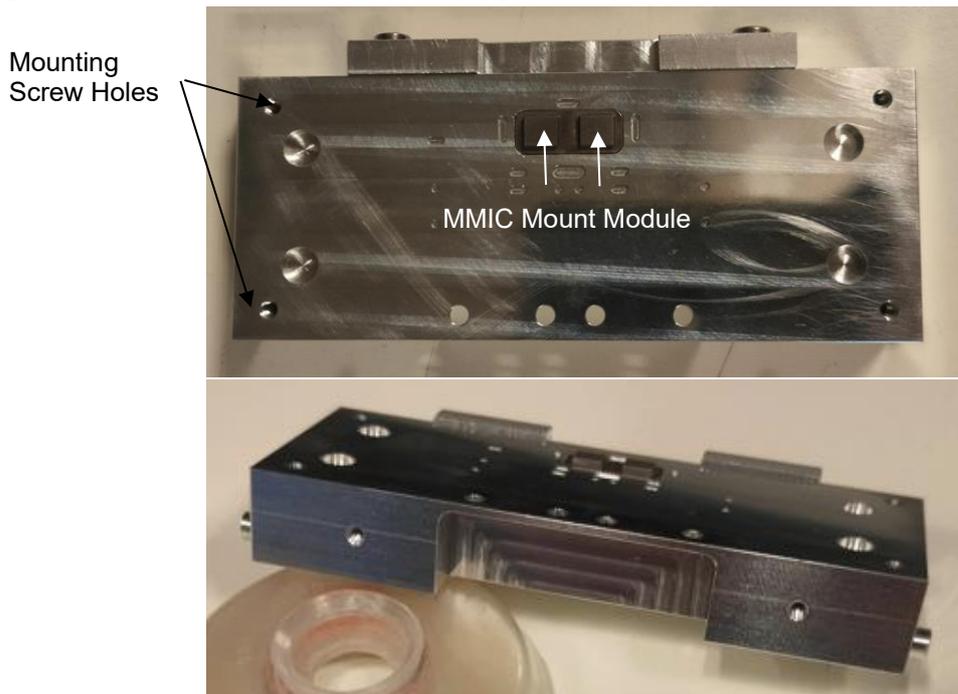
DRIFT PCB mounted structure with assembled MMIC mount module.
